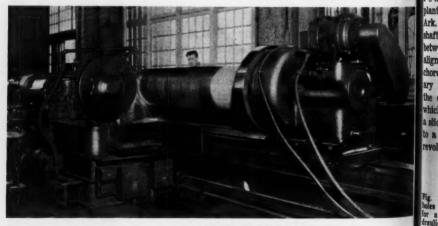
Grinding bearing diameters on columns for a 3,500-ton hydraulic press. The mathin is a 30-in. x 24-ft. cylindrical grinder
